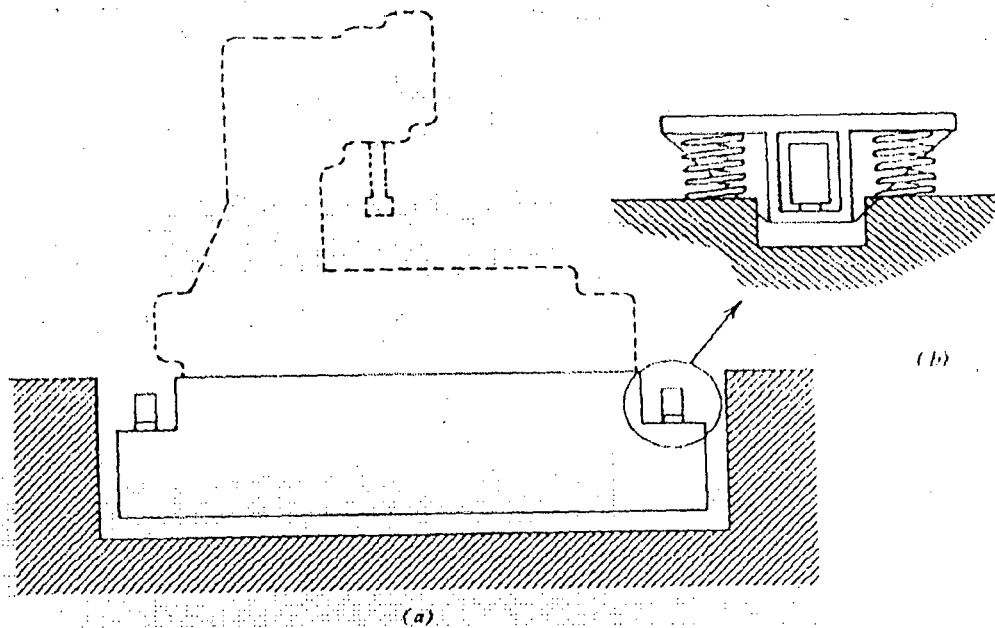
Centre-of-gravity mounting using cross beams and helical springs
